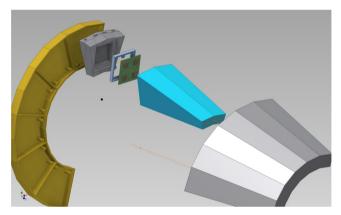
CAD drawing of the crystal arrangement in the aluminum shell and SiPM board.
